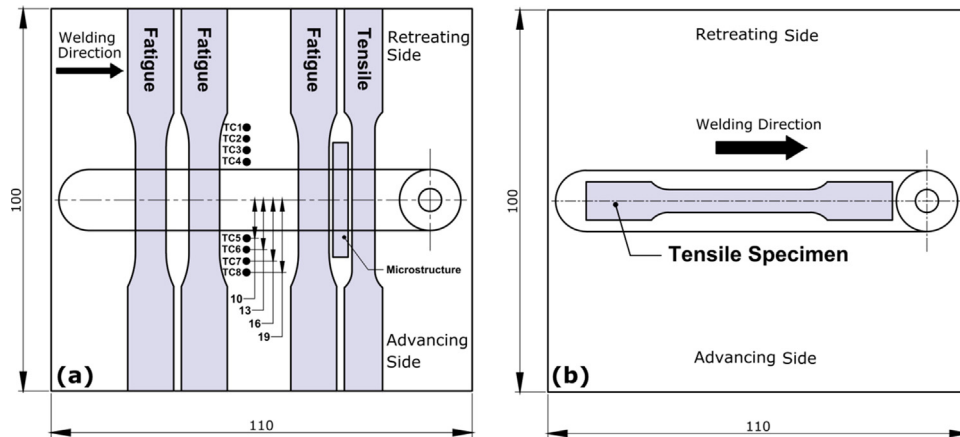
(a) Illustration of friction stir welds and the positions of the thermocouples attached on the samples and the extraction of cross-weld testing sample locations, (b) the extraction of longitudinal tensile sample location from the weld (all dimensions in mm).
